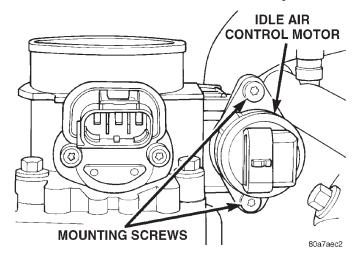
Mounting Bolts (Screws)—IAC Motor
